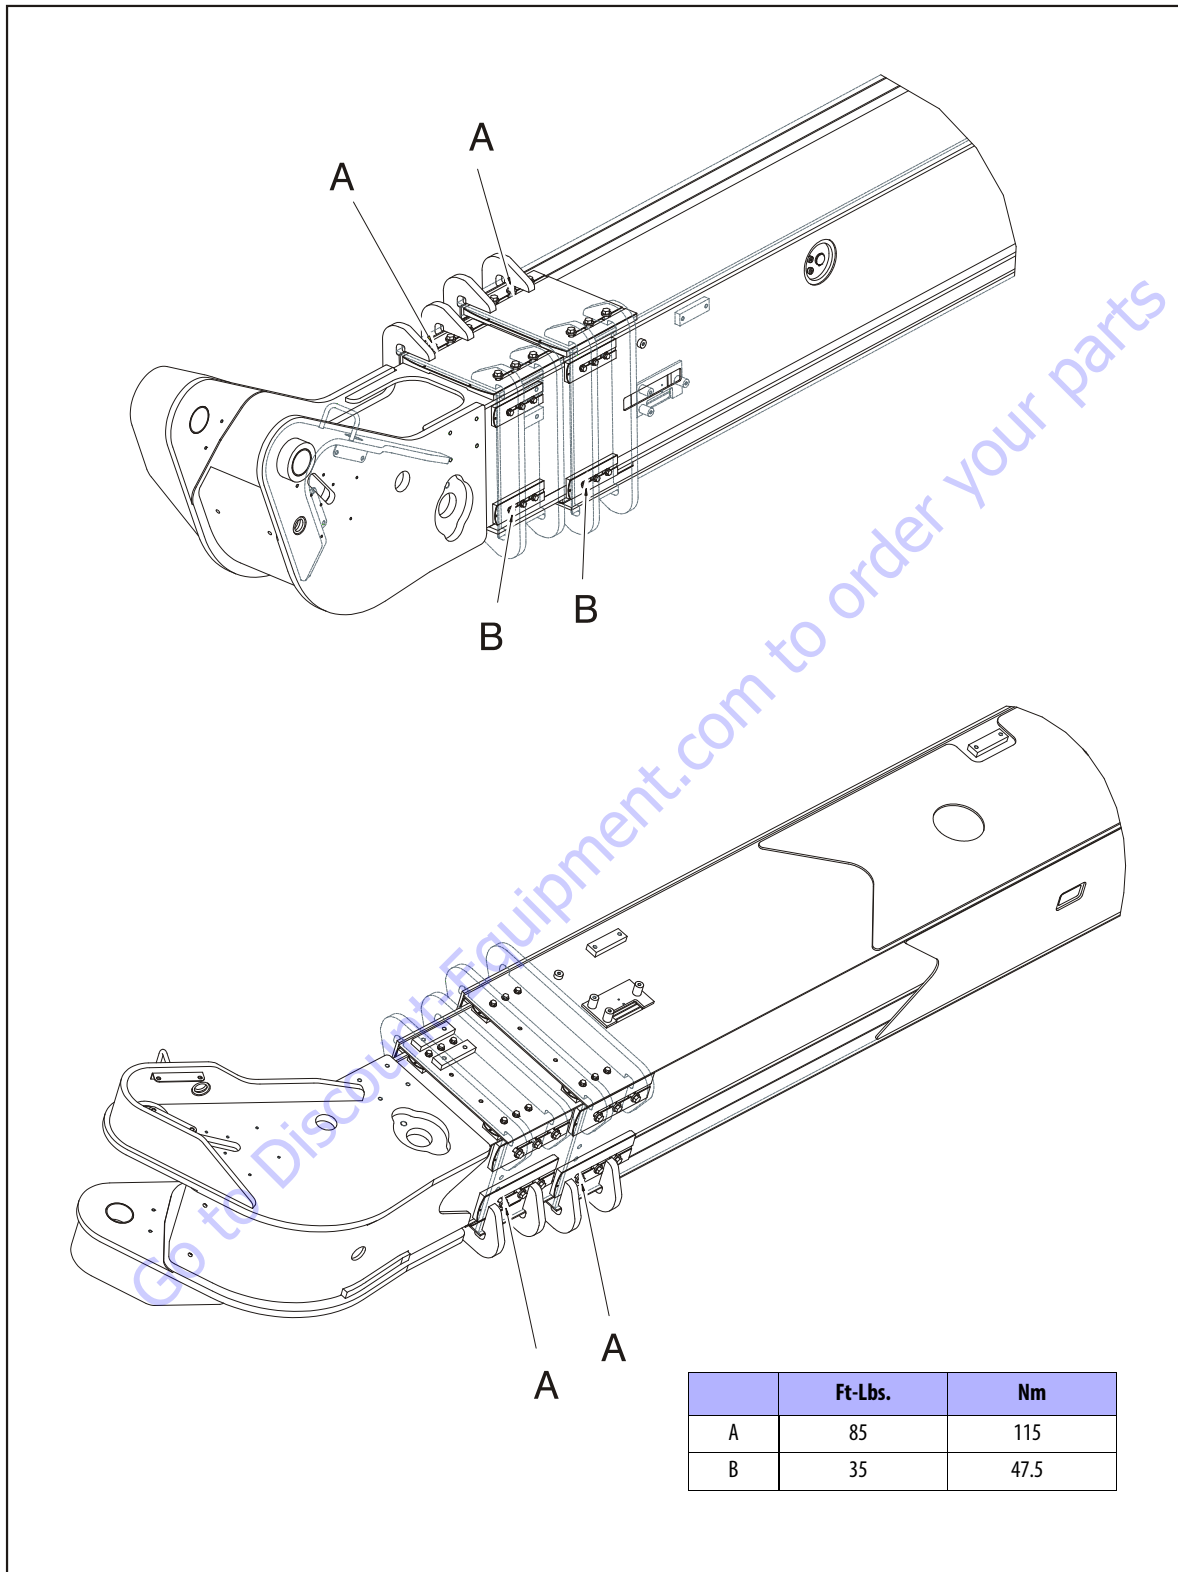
Tower Boom Assembly Torque Values - Sheet 1 of 2
